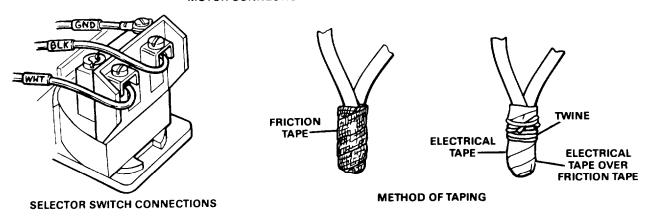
Distribution Pump and Motor Assembly (sheet 3 of 5)
